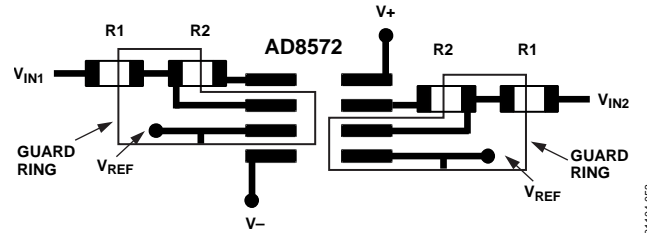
Top View of AD8572 SOIC Layout with Guard Rings
